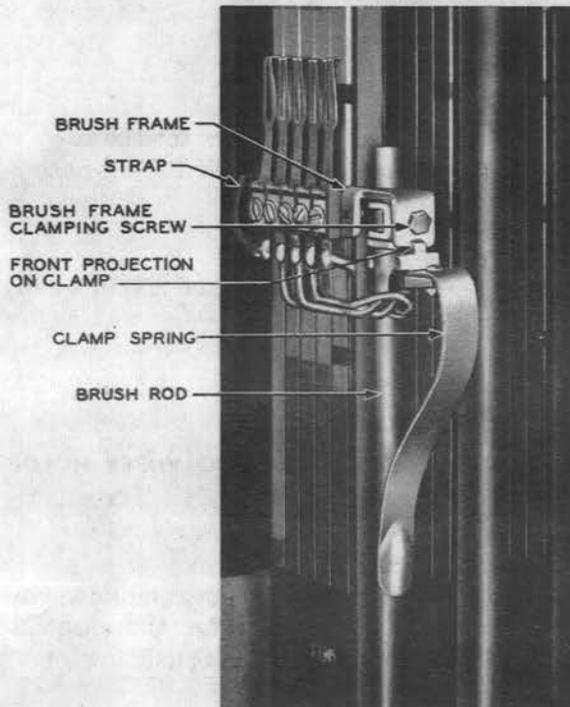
613A Clamp Mounted in Position on Brush Rod
